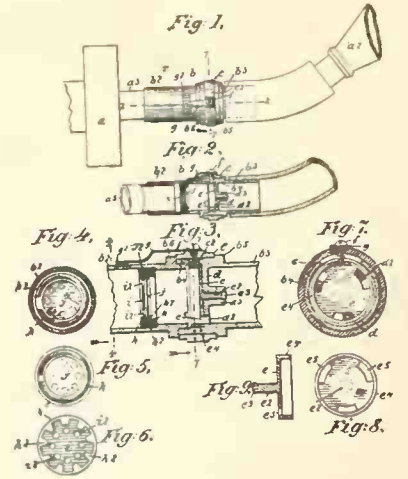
, a sectional view of the attachment on the line 2 2 of Fig. 1; Fig. 3, a view similar to Fig. 2, but showing the attachment proper on an enlarged scale; Fig. 4, a section on the line 4 4 of Fig. 3; Fig. 5, an end view of a supplemental vibratory device which is employed; Fig. 6, a reversed side view of the vibratory device shown in Fig. 5; Fig. 7, a section on the line 7 7 of Fig. 1 and on the line 7 7 of Fig. 3 and also a similar section through Fig. 2; Fig. 8, a side view of a valve plate which is employed, and Fig. 9 a transverse section thereof.
